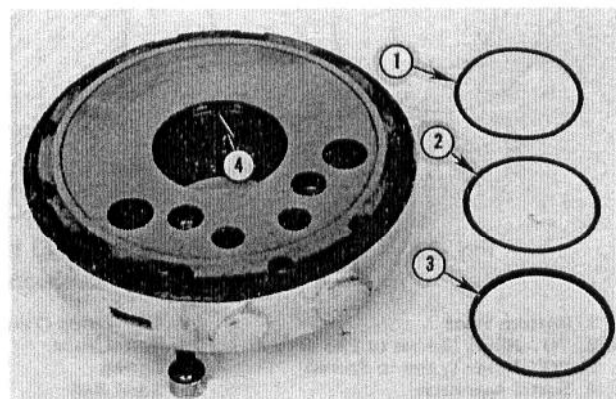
Wedge Seal and Related Parts Removed From Top Plate
